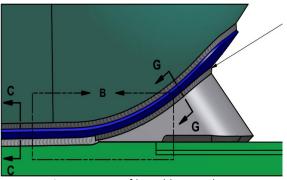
Drawing of head brace depicting re-pad and welds at location of tank fracture. (Courtesy, Trinity Industries Leasing, Inc.)
